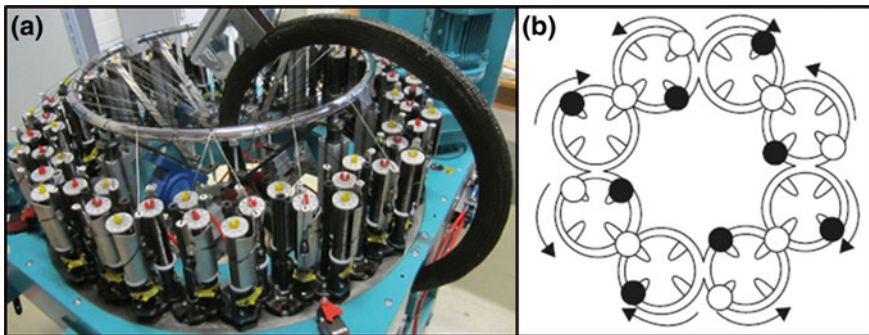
a 2D circular braiding machine. b Schematic views of the predetermine carrier path [82, 165]
